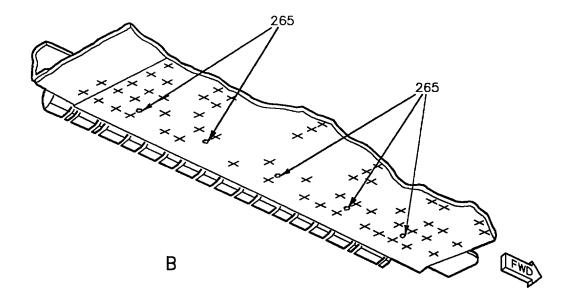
Skin (74A110601) Fasteners (Sheet 2)
